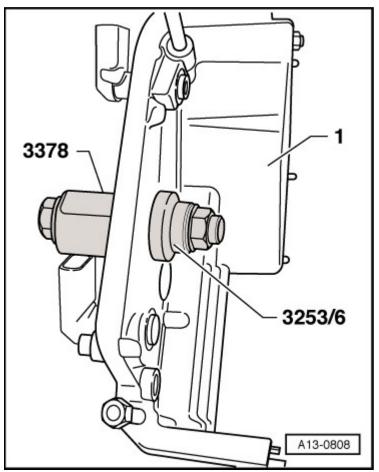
Inserting Oil Seal Into Upper Cover For Camshaft Timing Chain With Installation Sleeve 3378
